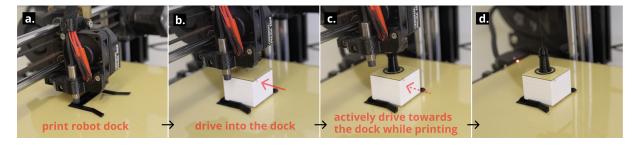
Printing sequence for standard 'printing on top of toio' using a robot dock. (a) shows the robot dock being printed. Immediately after the extruder moves up, and (b) the toio drives into the dock. During printing the toio is (c) constantly driving forward to maintain stability. Finally (d), objects are successfully printed on top of toios.
